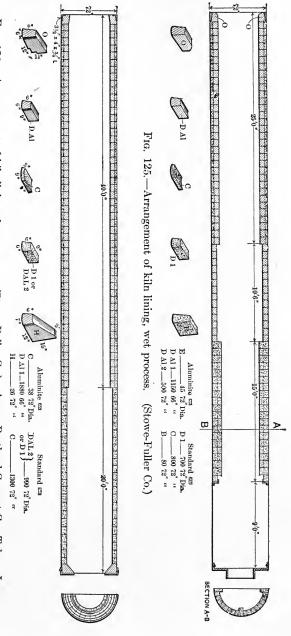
Arrangement of kiln lining, dry process. (Stowe-Fuller Co.) Asano Portland Cement Co., Tokyo, Japan.
